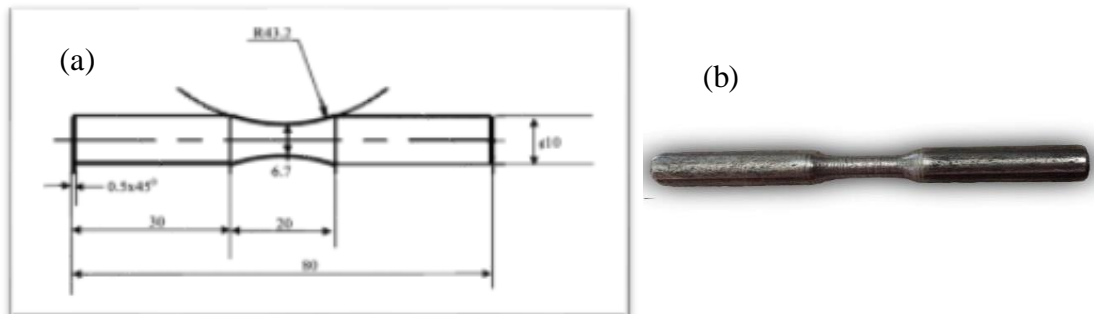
Specimens used in fatigue tests, where the dimensions in mm (FARFAN, 2004): a) - standard dimension specimen b)- real specimen used in experimental works with the same standard dimension.
